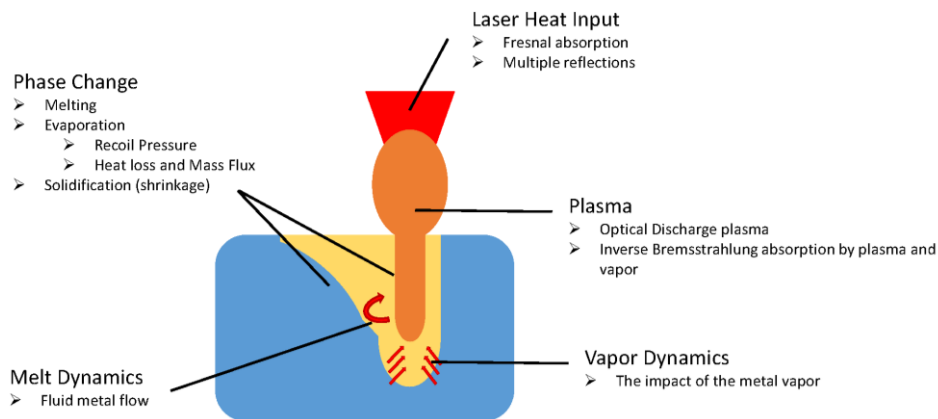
Schematic of physical phenomena in laser welding.
